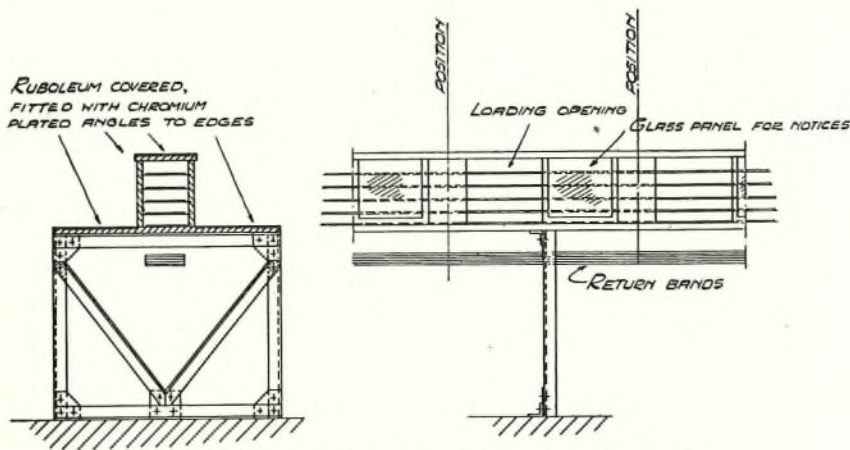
SECTION AND ELEVATION OF SORTING FITTING.
